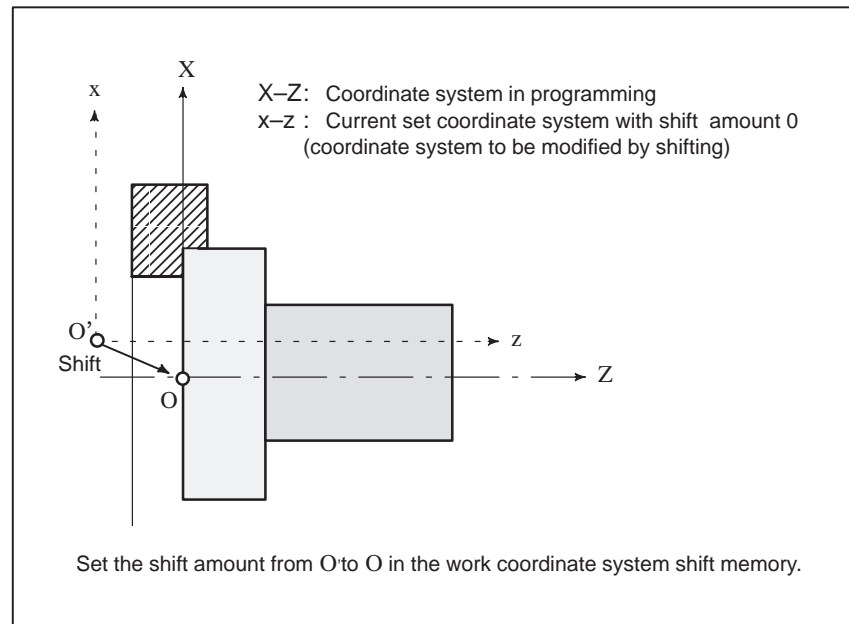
(a) Workpiece Coordinate System shift
